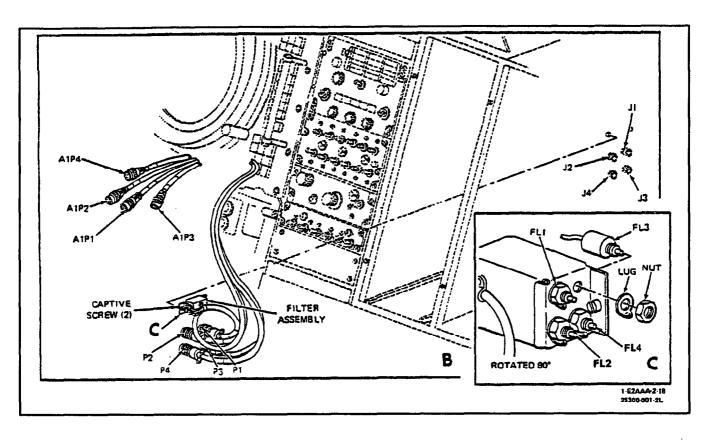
Removal and Installation of Cable Assembly Set and RFI Filter (Sheet 2)
